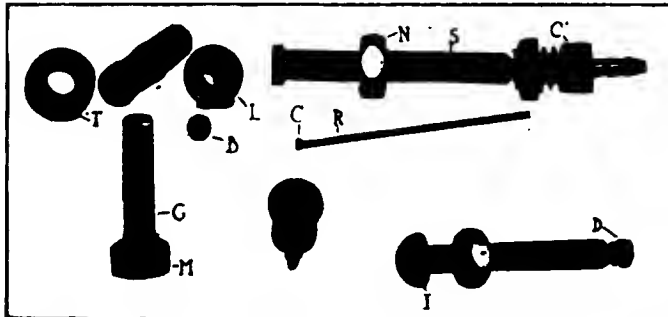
Standard tire valve and slip-off casing, useful when a driver is accustomed to frequently test the pressure
